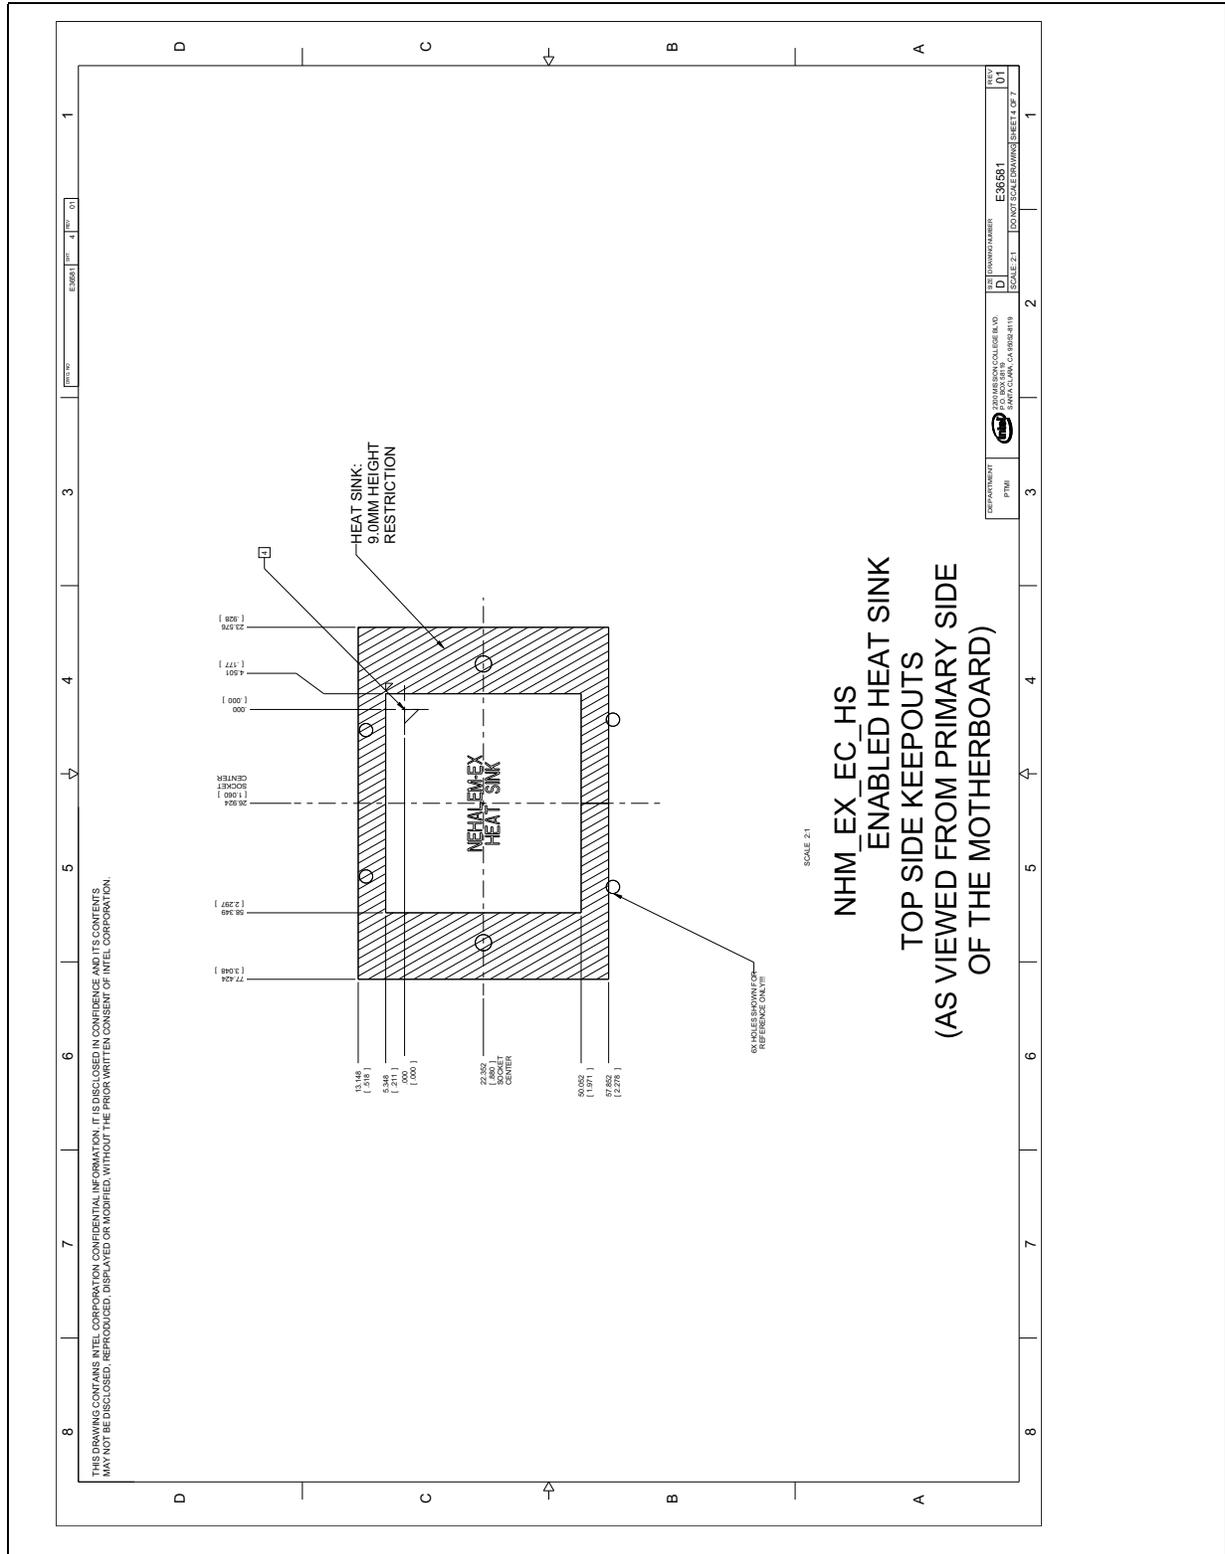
Enabled Component Board Keepout Mechanical Drawing – Sheet 5 of 7
